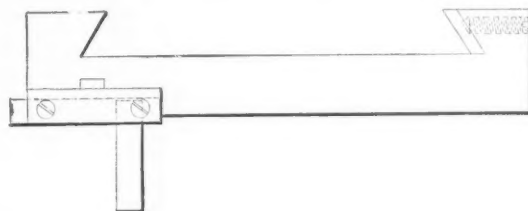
Bracket to be secured to Milling Machine Column when Cutting Cam.
